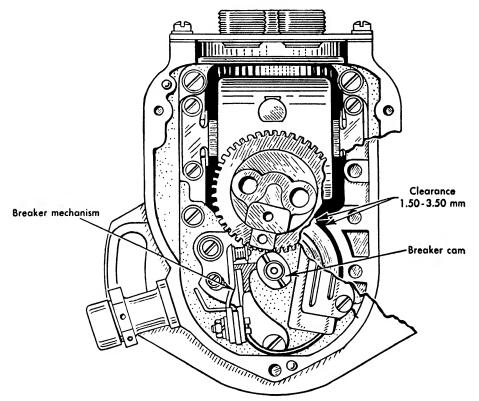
Drawing of a magneto showing breaker cams, breaker mechanism, and clearance between armature and field coils. (Courtesy Eisemann Corporation)
